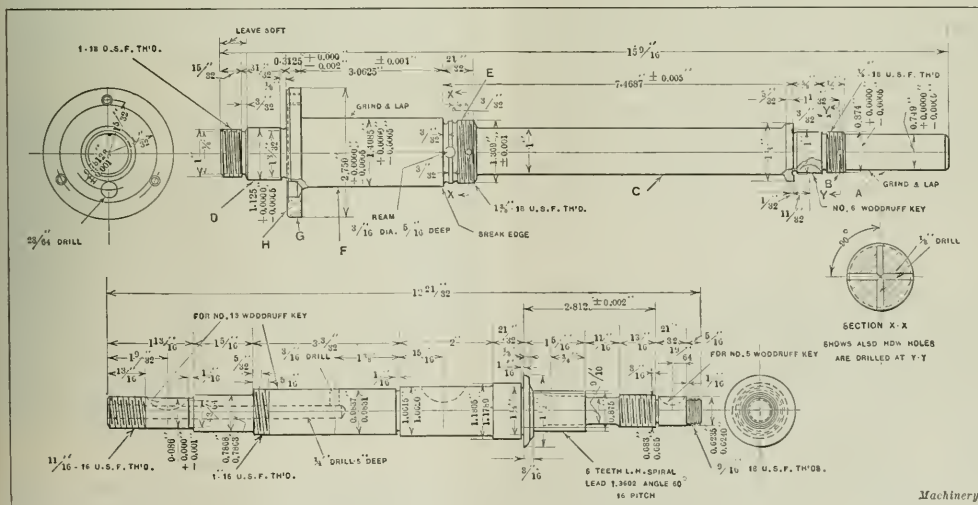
(Top View) Intermediate Shaft; (Bottom View) Fan Shaft
